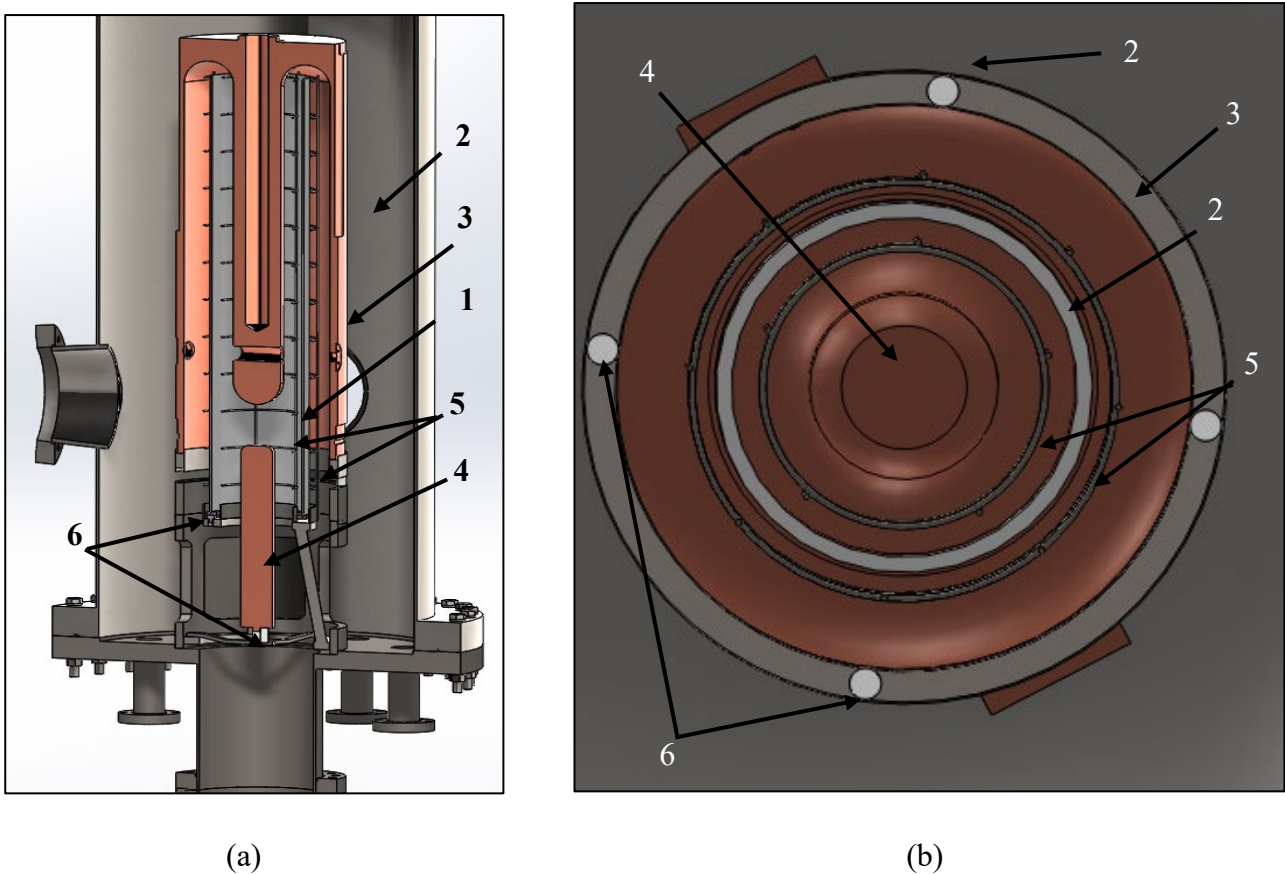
Section view of the side (a) and bottom (b) of the cavity sputtering system.
